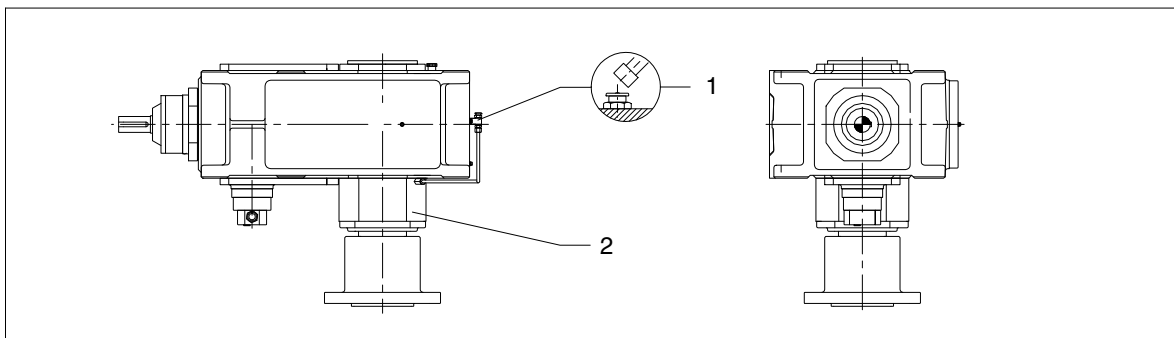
Lubricating point for lower output-shaft bearing of type B3BV with oil-dam pipe (see item 5.7.5)
